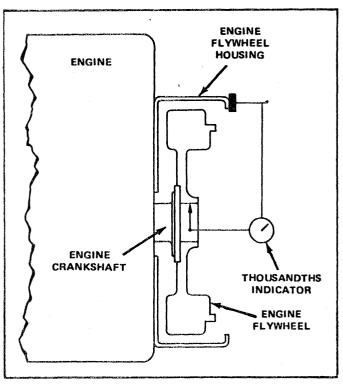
Checking pilot bearing bore of engine flywheel.
